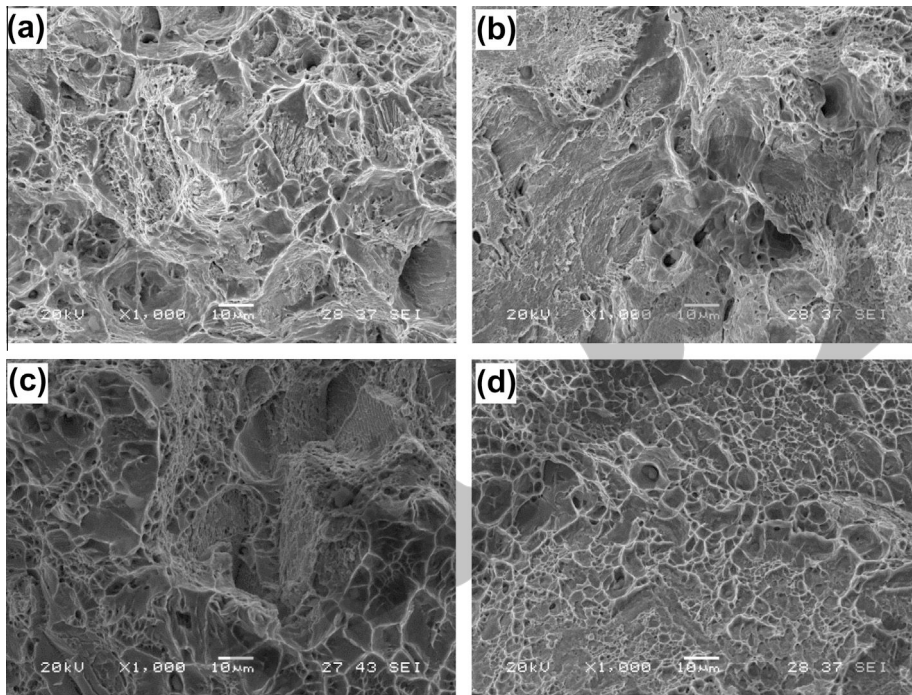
Fracture surfaces of the MC steel forged and then cooled in different medium (a) as-received, (b) sand, (c) air and (d) oil.
